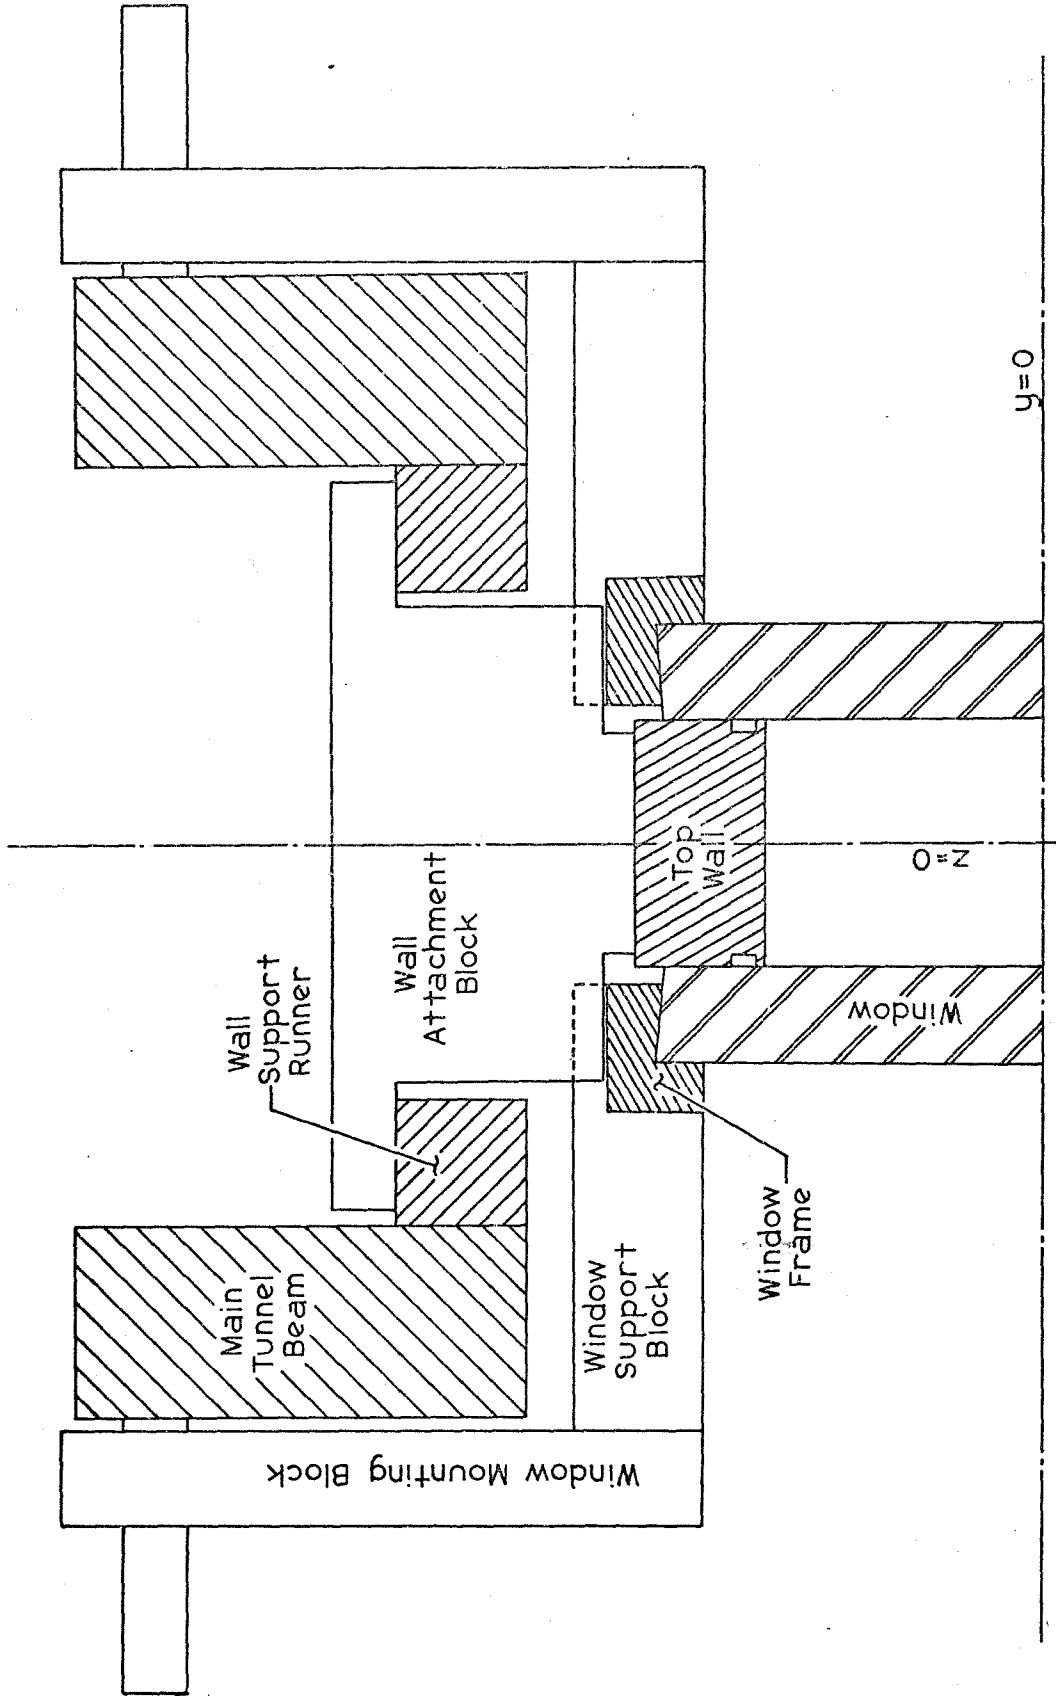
Vertical Cross-Section of Wind Tunnel
